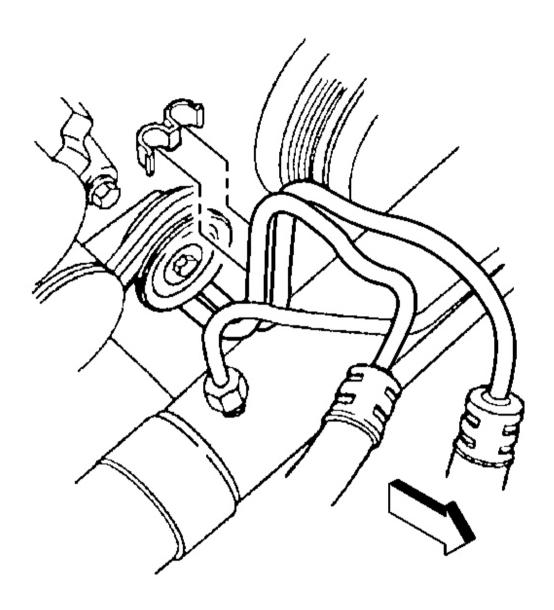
TOC Front Pipe & Front Clip Courtesy of GENERAL MOTORS CORP.
